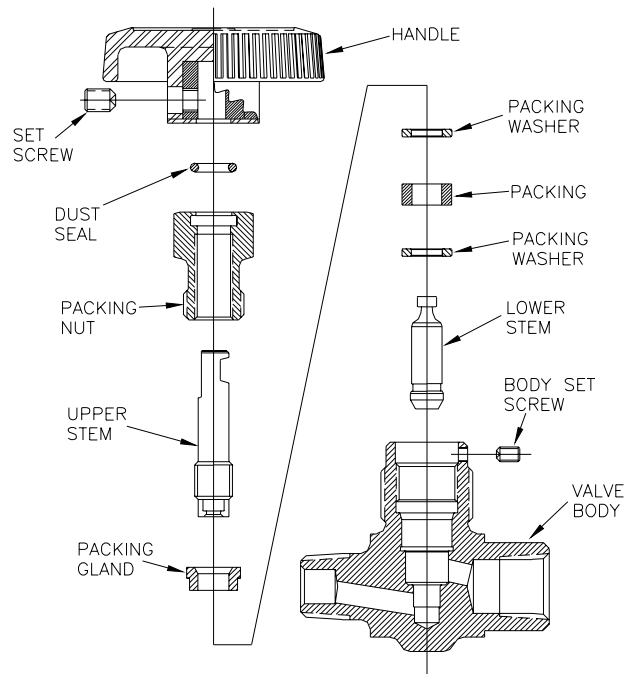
NP Series Needle Valve w/PTFE Packing Exploded View
